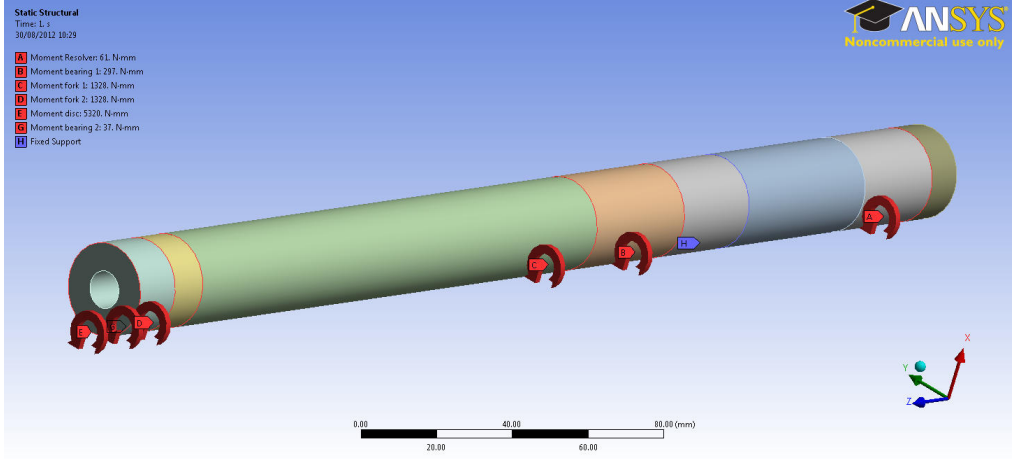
Shaft geometry with the disc located to the left in the picture.
